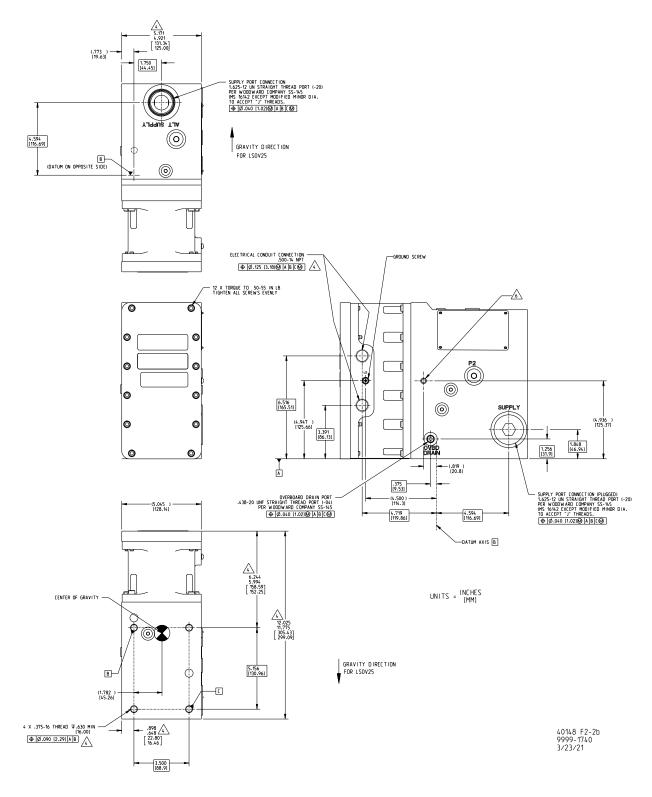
Outline Drawing LSOV25 with Proximity Switch
